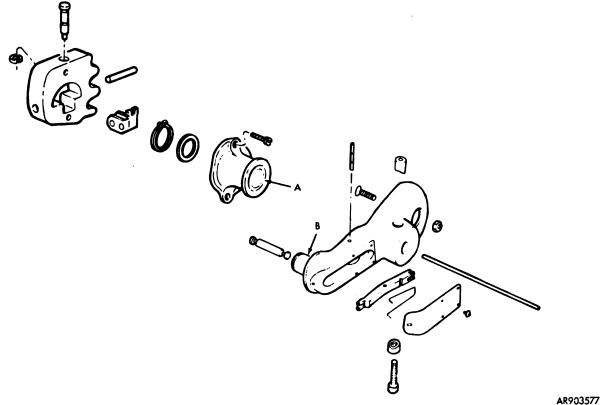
Manual elevation pump arm removal, disassembly, or assembly (3 of 3).
